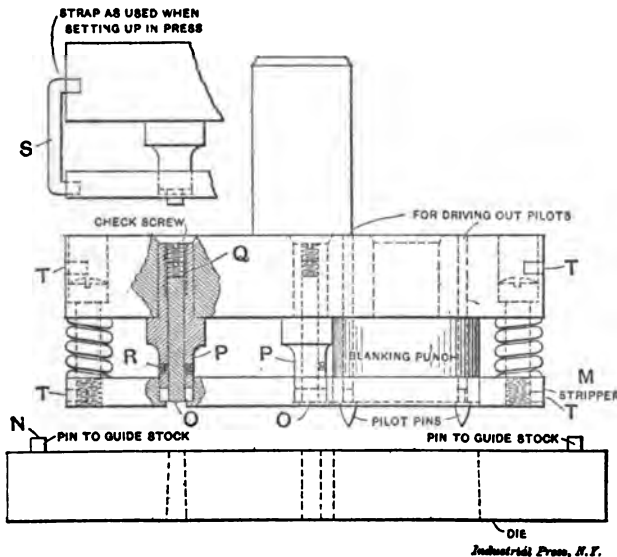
Die with Stripper Attached to Punch to Flatten Stock
